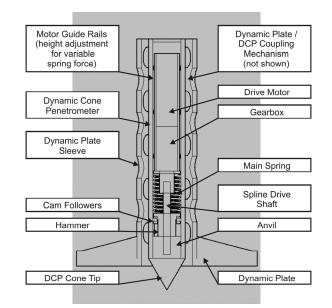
Initial Hybrid Dynamic Plate and Dynamic Cone Penetrometer design with a common impact drive mechanism.
